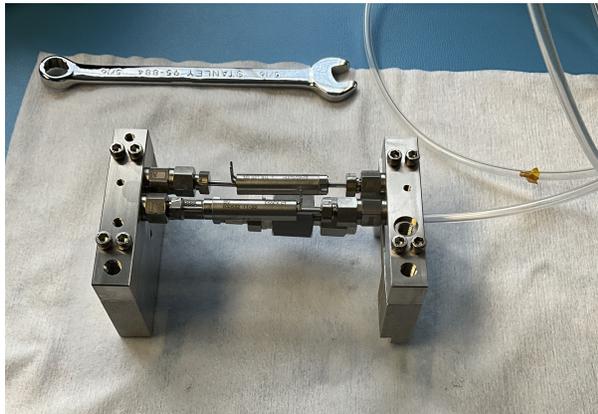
FM1 valve sub-assembly mounted to leak check GSE.
